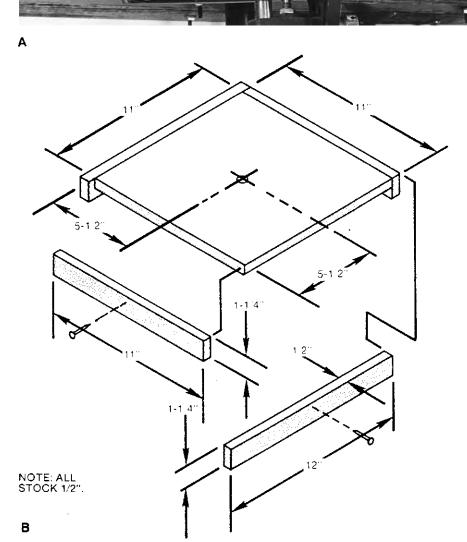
(A) This plywood table will give you added support when cutting thin metal. (B) Construction details of an auxiliary plywood table.
